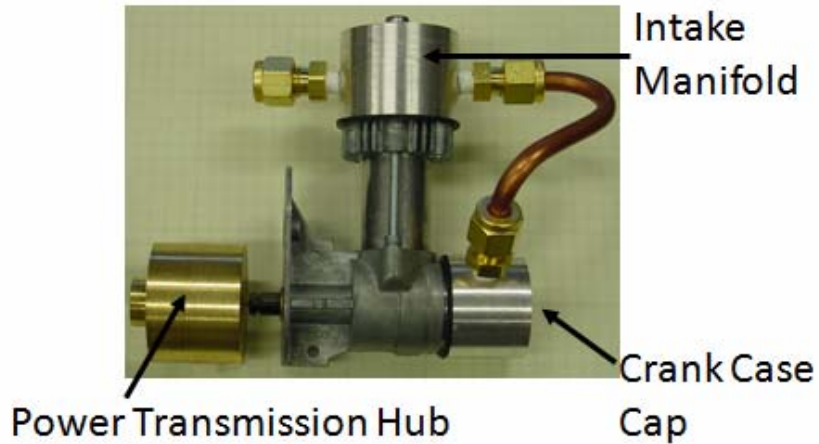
Air compressor with additional components required to convert it into a compressor suitable for refrigerants.
